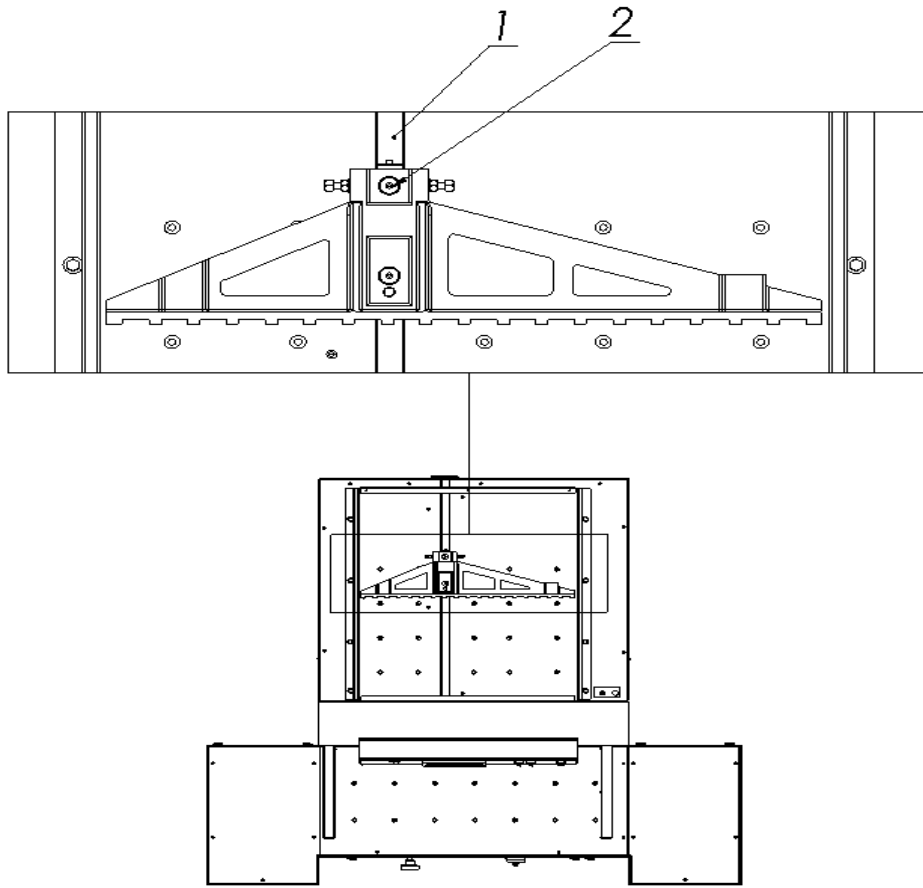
Locations of the knife lubrication locations (knife in Upper position)
